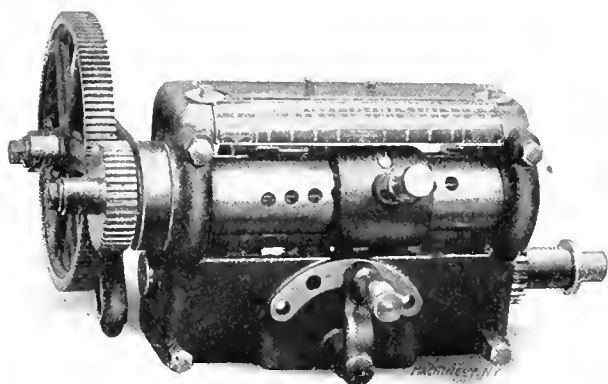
Gear Box, complete, ready to be Applied to Machine
